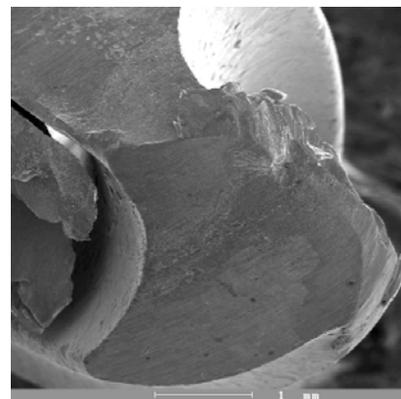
The base tool wear mechanism - plastic deformation of major cutting edge
